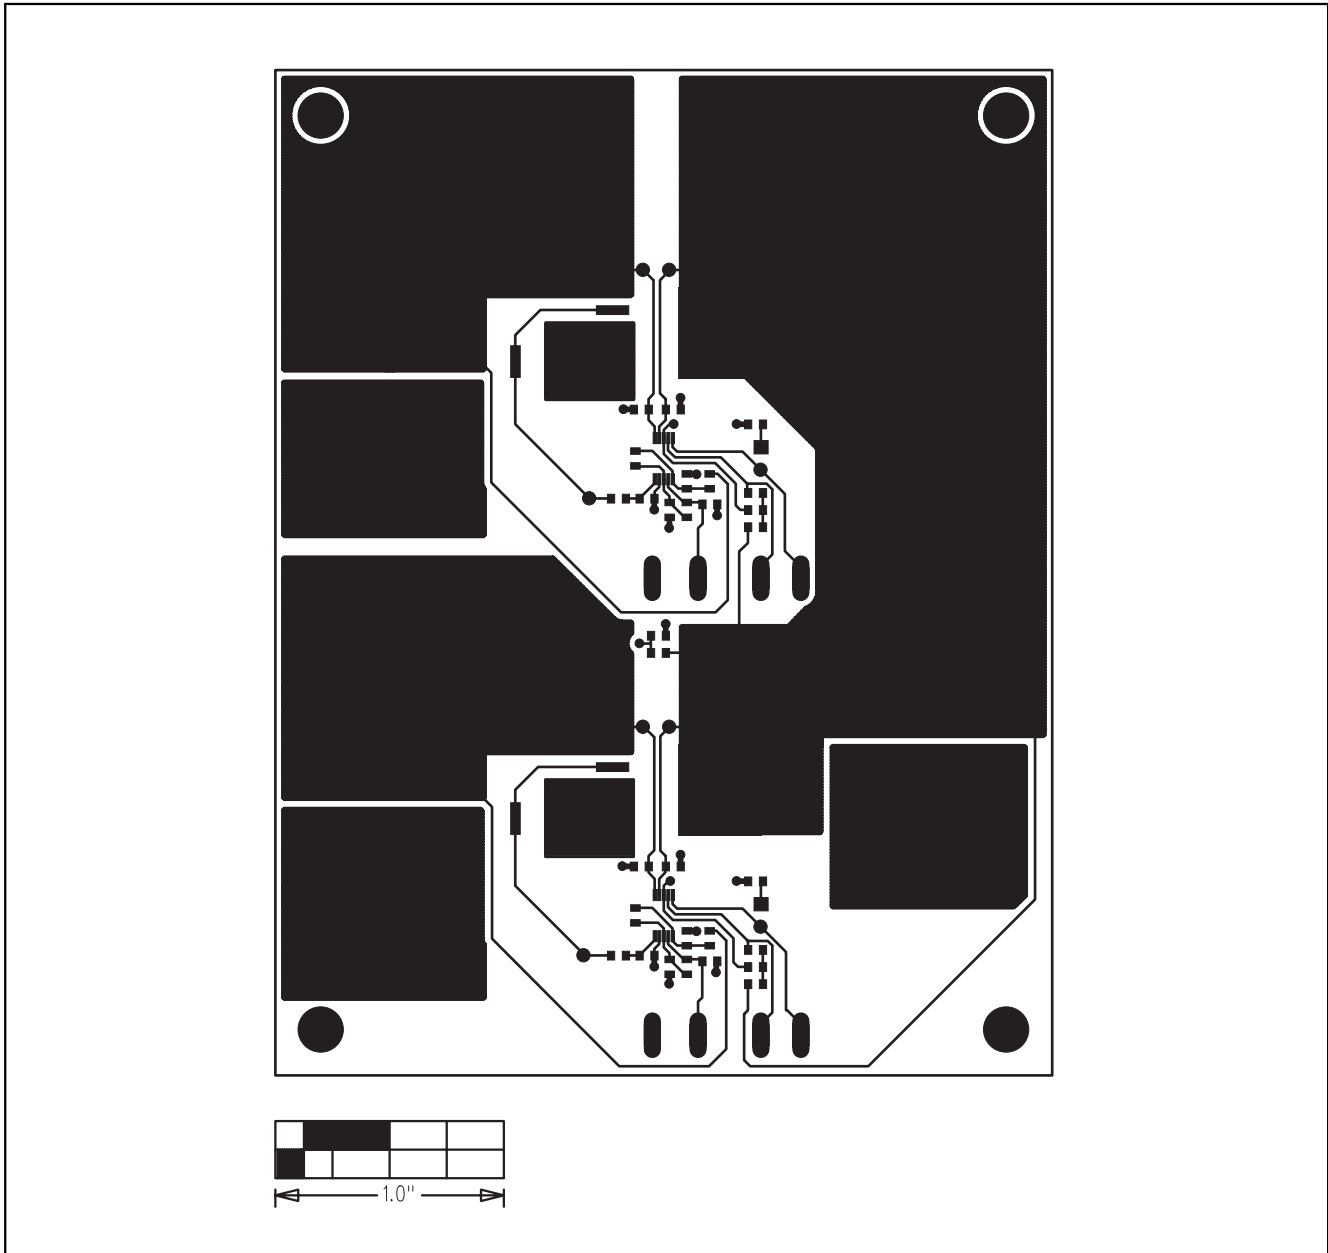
MAX8555A EV Kit PC Layout—Component Side (Layer 1)
